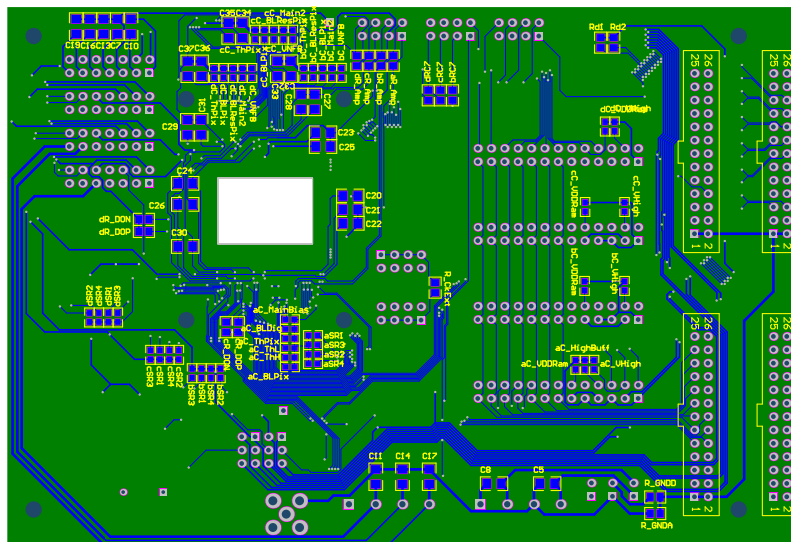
Bottom side layout of the combined carrier PCB for ATLASpix1 and MuPix8. The connection to the Multi-purpose Adapter Board is established via four box headers on the right.
